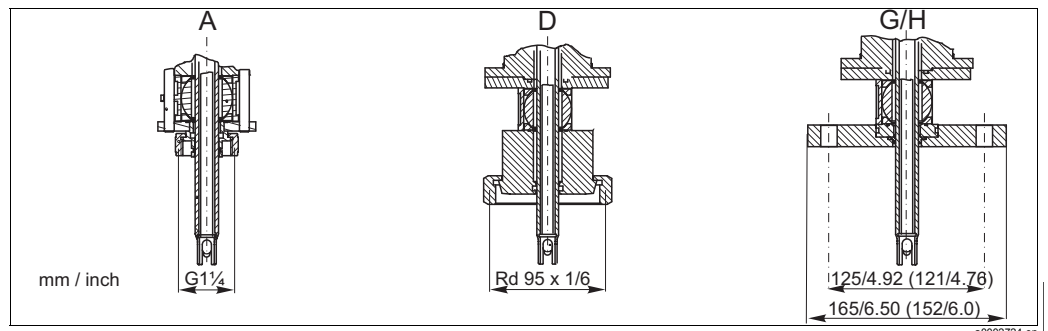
Process connections OPA473 (dimensions in brackets: ANSI flange)
